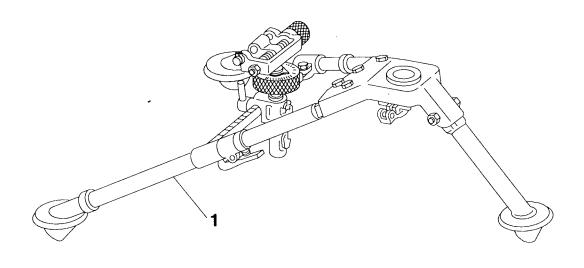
Mount, Tripod, Machine Gun, M122, 7790723, M122A1, 12976949 (Assembled View)
